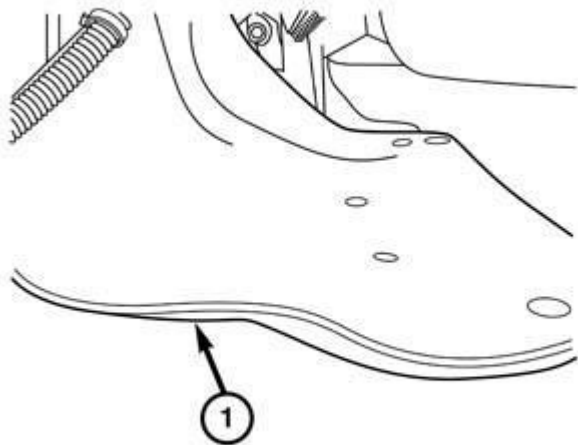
Engine Cover, Bolts & Oil Dipstick
